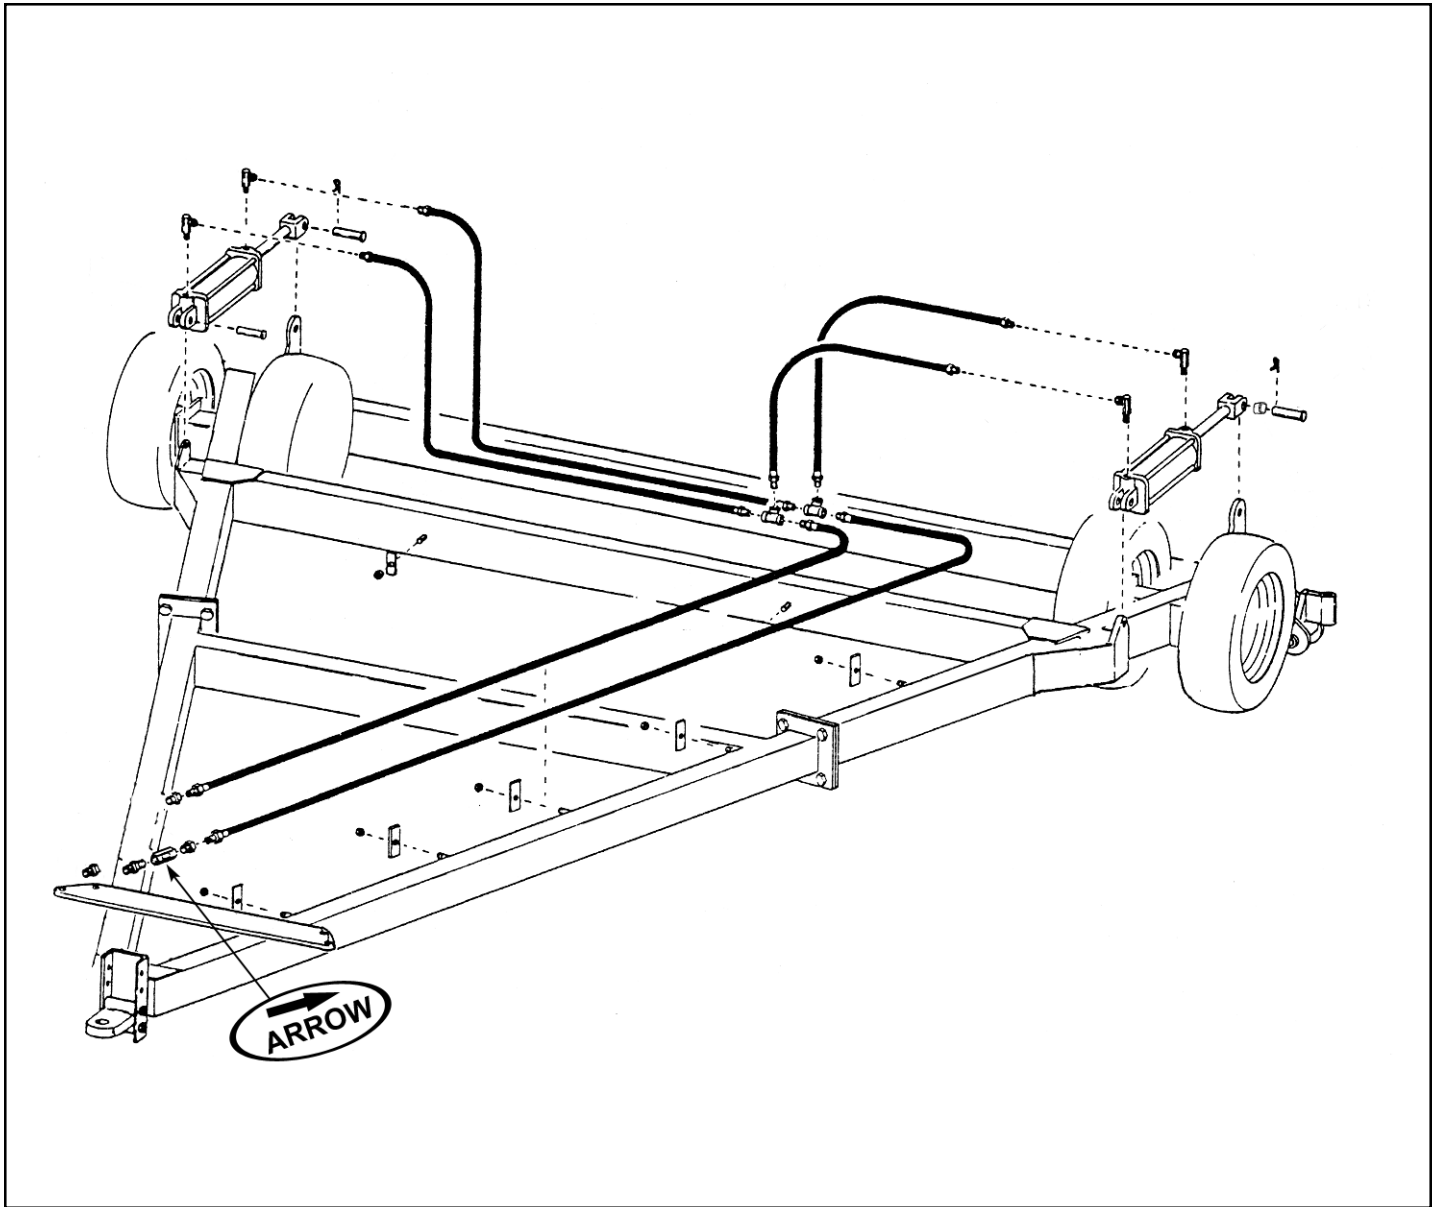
Hydraulic Lift System - 20 ft. Hitch
